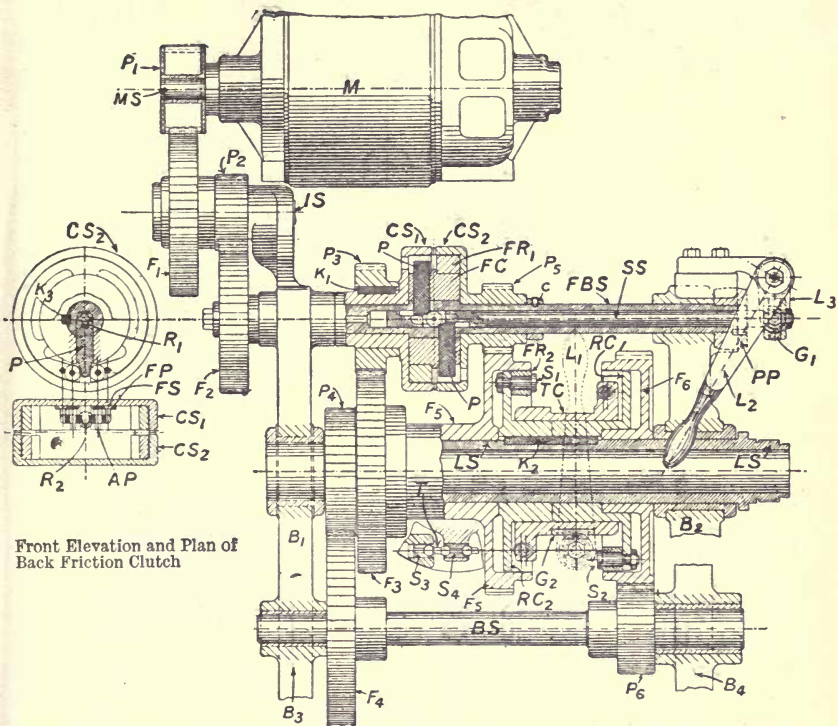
SECTIONAL PLAN OF AN ELECTRICALLY-DRIVEN HEXAGON TURRET LATHE, SHOWING ARRANGEMENT OF GEARS AND FRICTION CLUTCHES.
